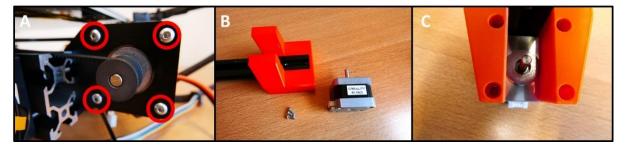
Stepper motor mounting. A) Gathering M3x6 screws from the Y stepper. B) All parts to be combined. C) Stepper motor mounted on the E Stepper Mount.
